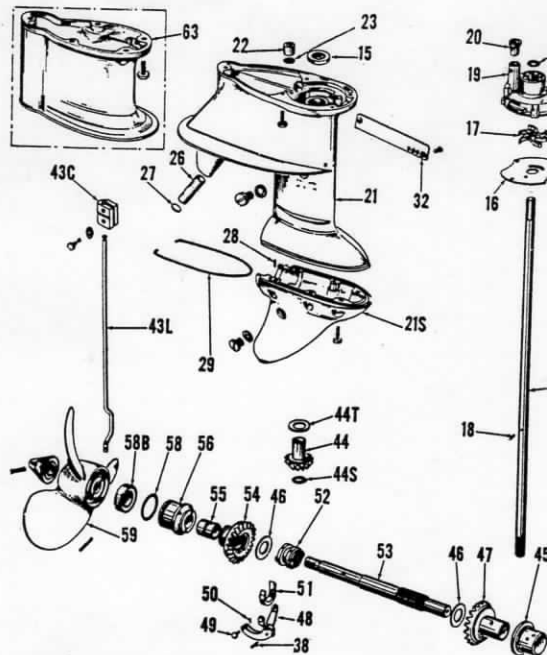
Exploded view of gear case assembly and water pump of the general type used.
